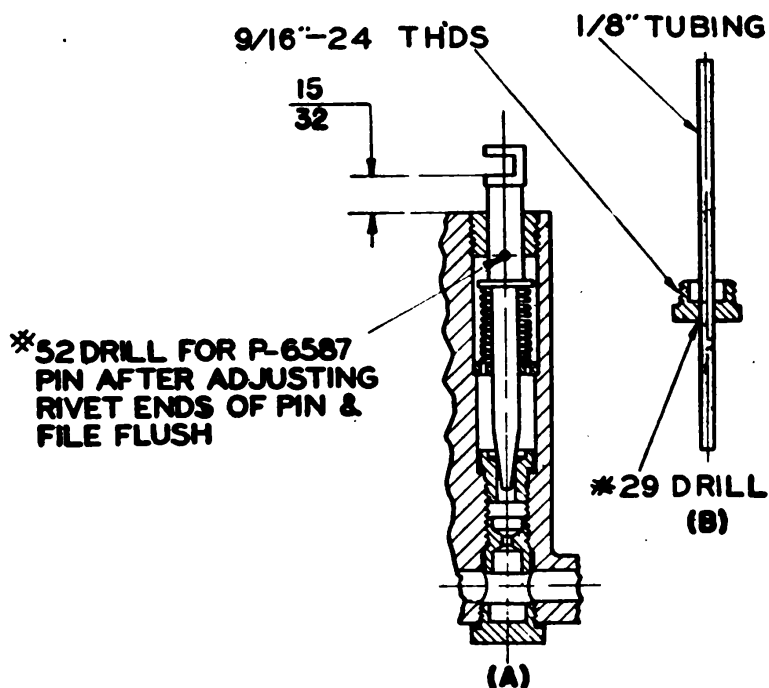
Preliminary adjustment of mixture-control needle valve and holder on NA-R9B carburetor.
